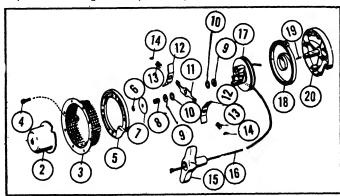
STARTER PARTS (Reference numbers shown on Legend, Figure 32.)
